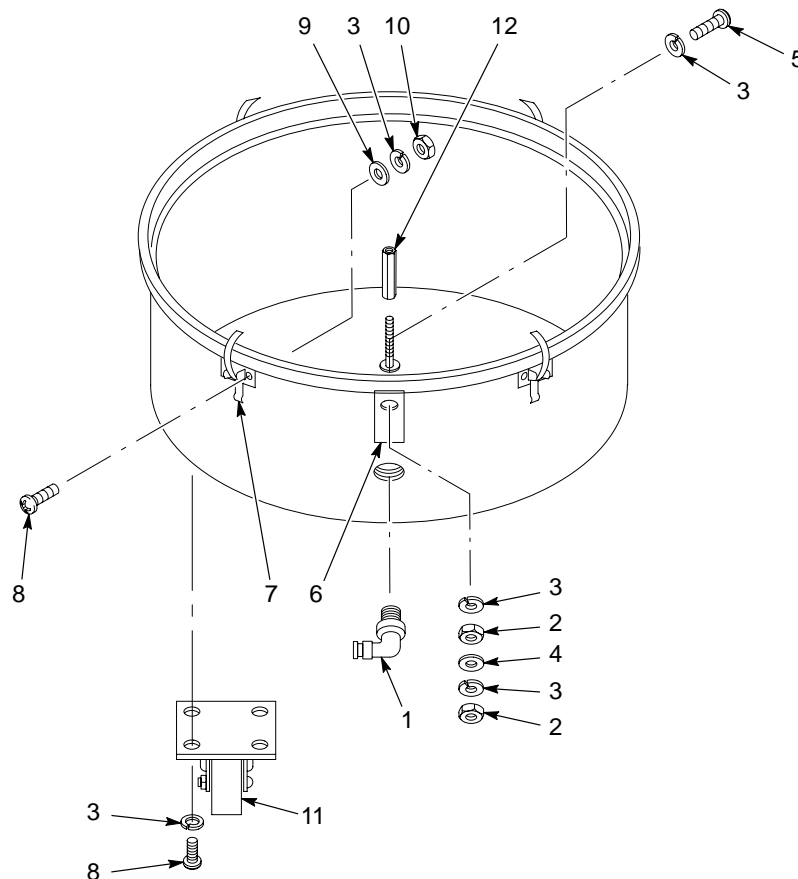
HR-16-150 Hopper Fluidizing Drum Parts
